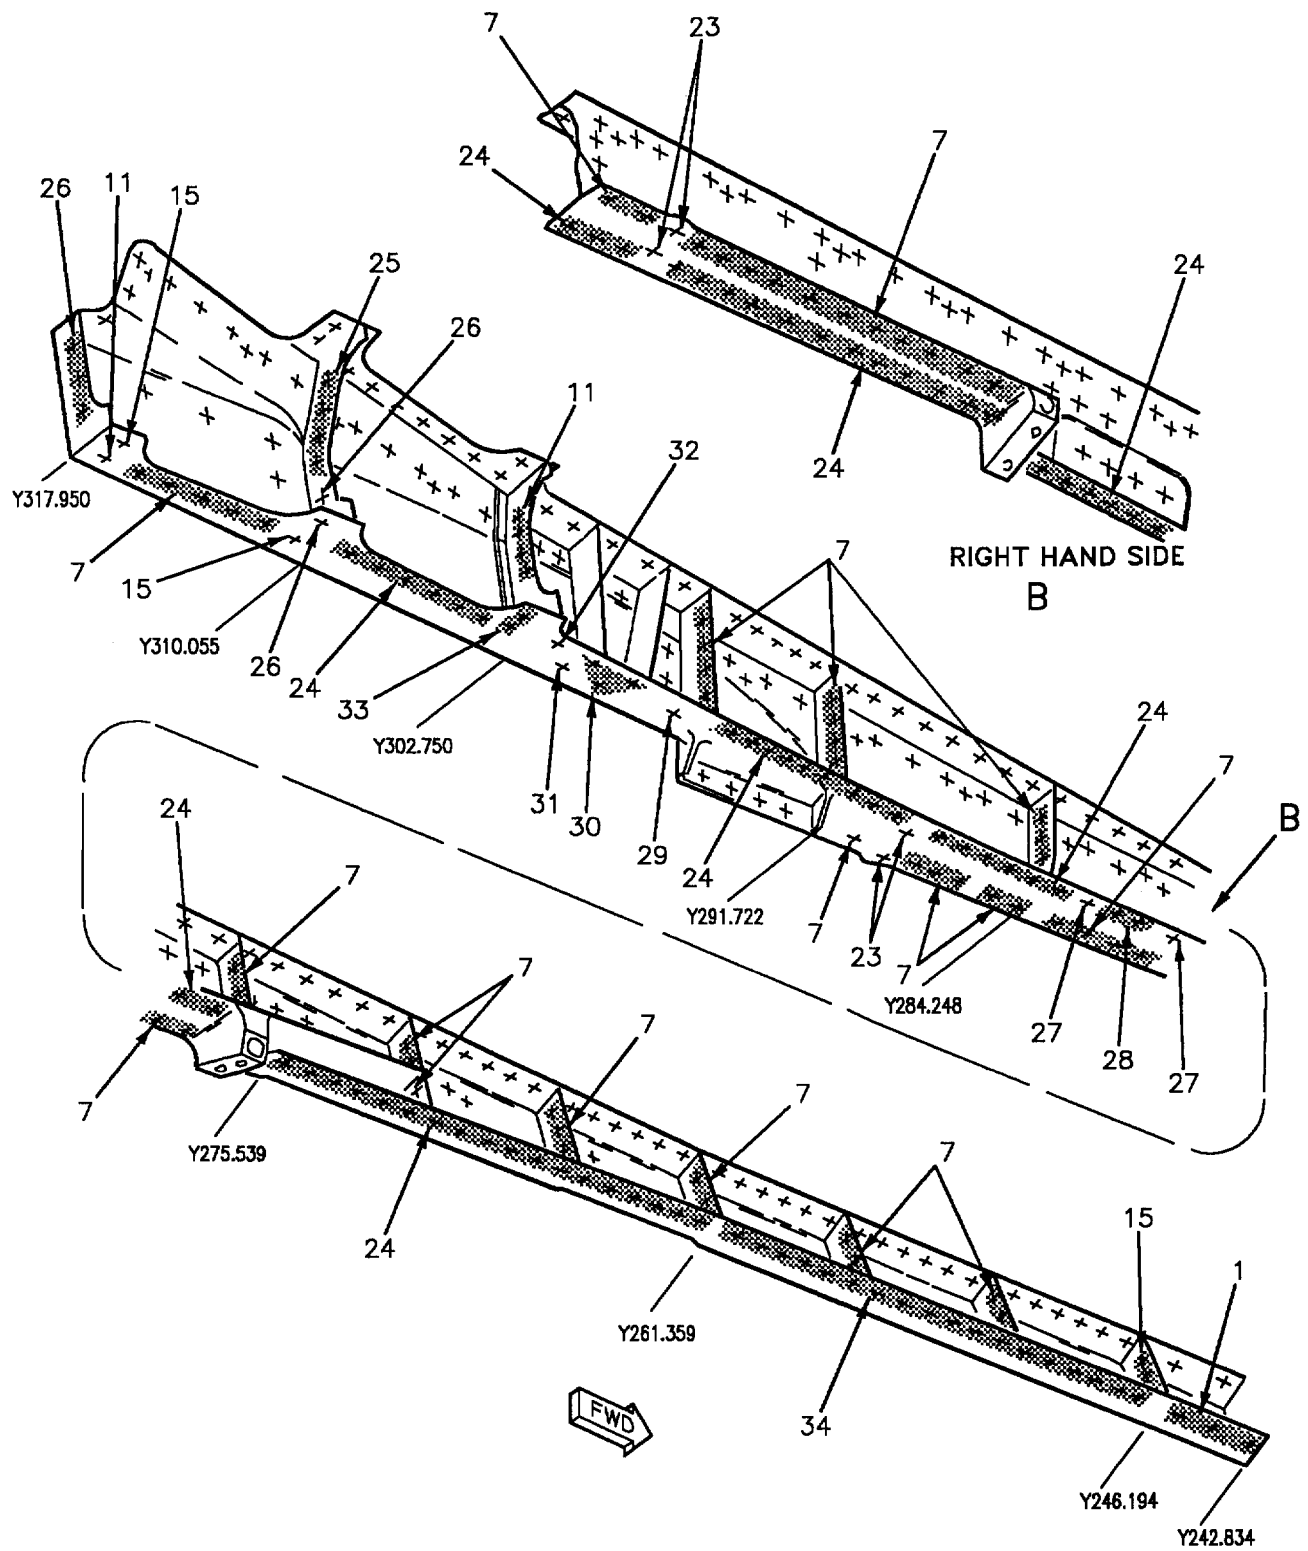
Side Frame, 74A350714, Fastener Index (Sheet 2)
